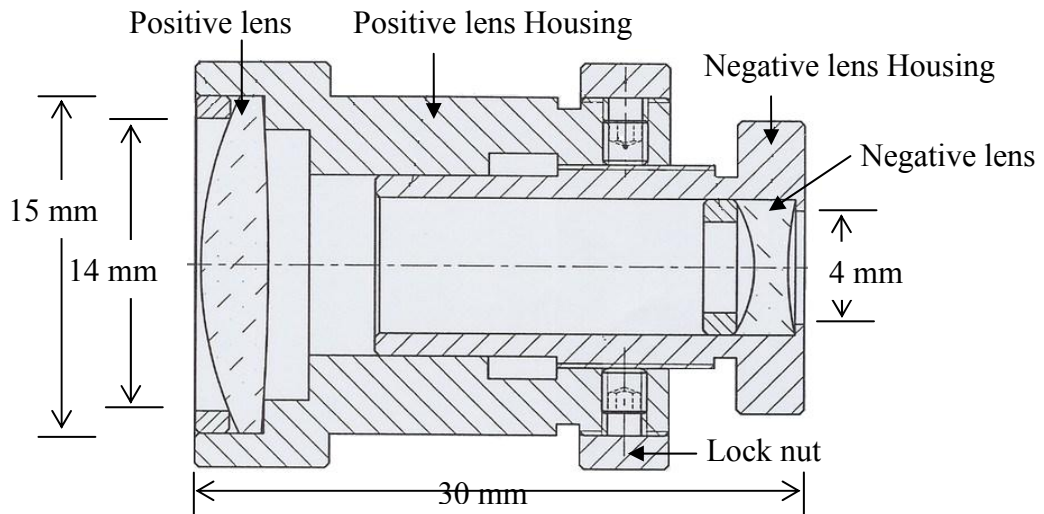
Design diagram and drawing of the beam expander mechanical housing.
